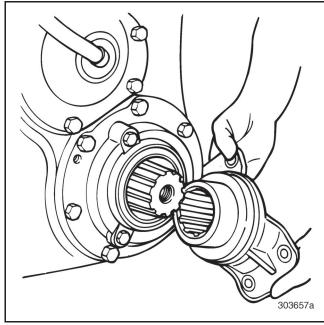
Removing Rear-Drive Shaft Output Yoke
